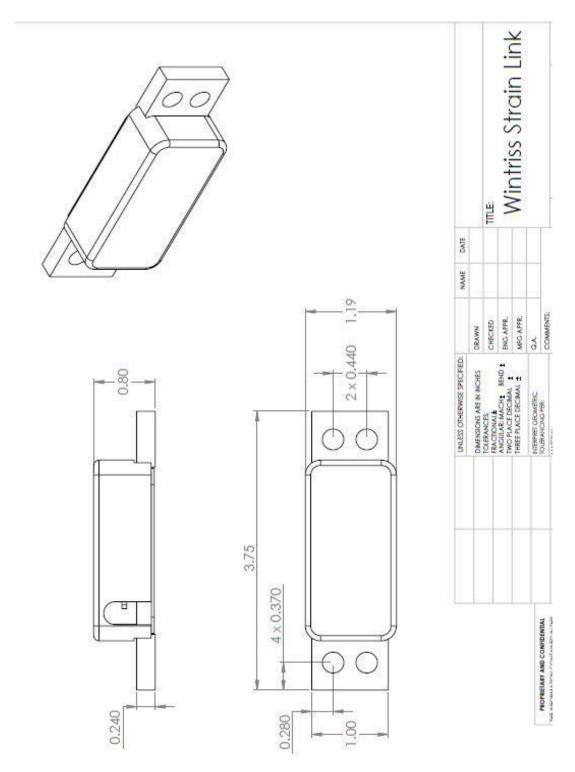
Dimensioned CAD drawing of Wintriss Strain Link.
